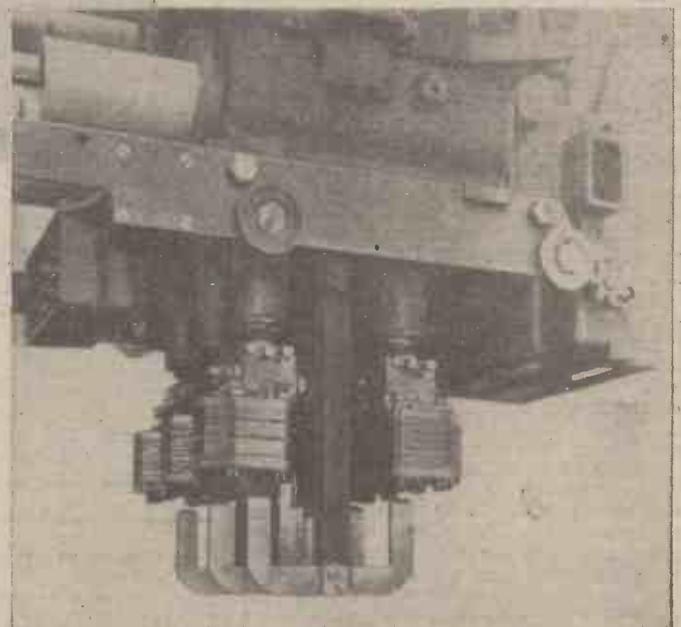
Typical oil-filled circuit-breaker contact assembly, showing "explosion pots."
